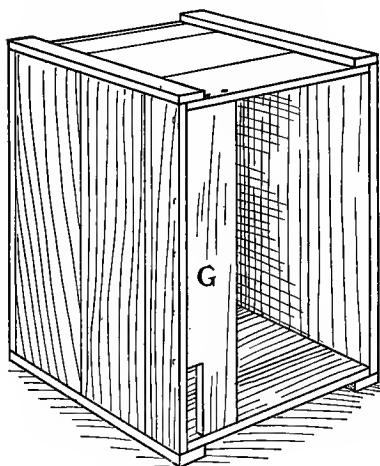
The Board *G* Forms a Pocket for the Vise Sliding-Strip.
